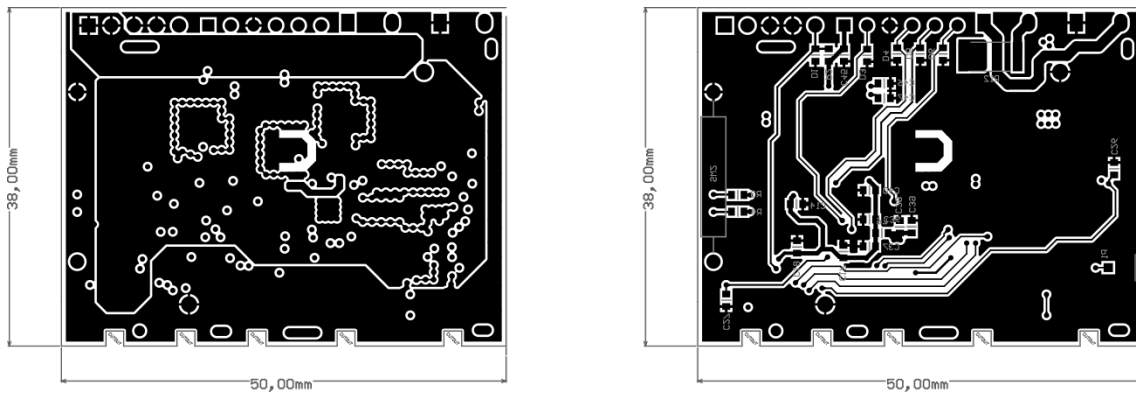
Layer 2 and Bottom layers of the SX1262 Board.
